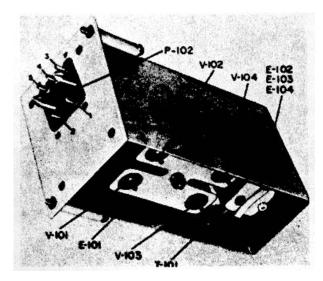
R-F Amplifier (AM-101), Bottom Oblique Interior View (Dust Cover Removed)
